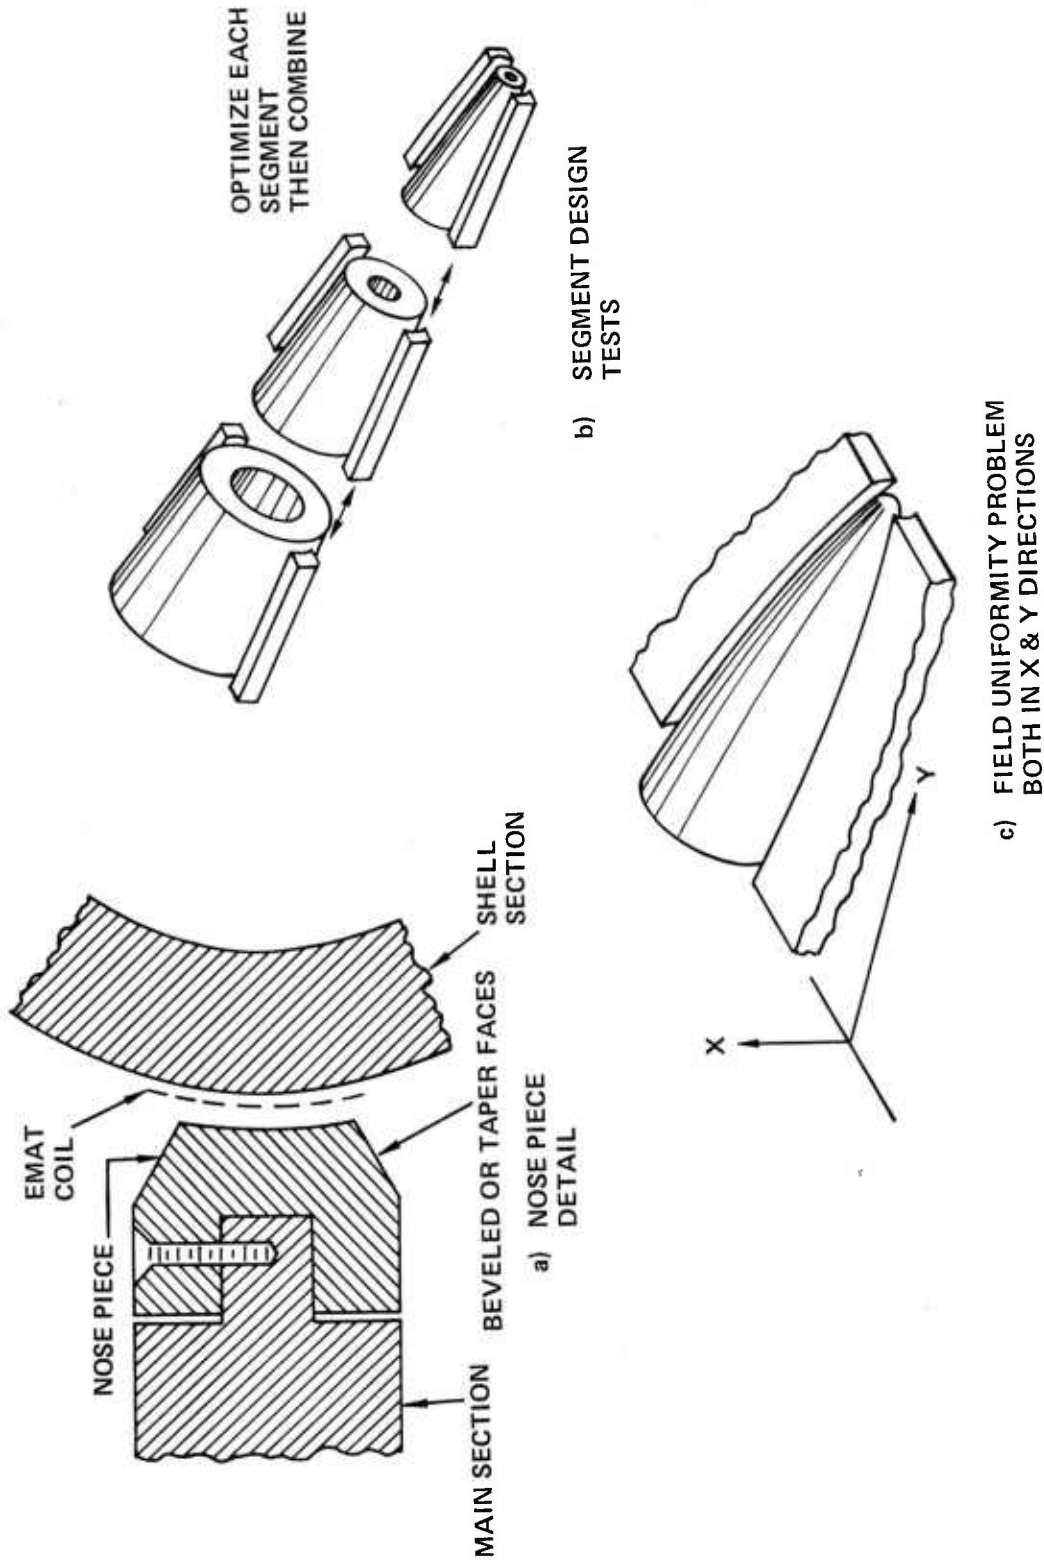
Magnet design: to empirically design magnet pole pieces to yield maximum uniform normal flux into the projectile. Projectile is sectioned into 3 parts about 6-1/2" long. A series of differently shaped nose pieces are attached to the test electromagnet and field uniformity and EMAT generation efficiency tests are made. The 3 pole pieces are then used as a guide to design a final complete polepiece for the entire projectile.
